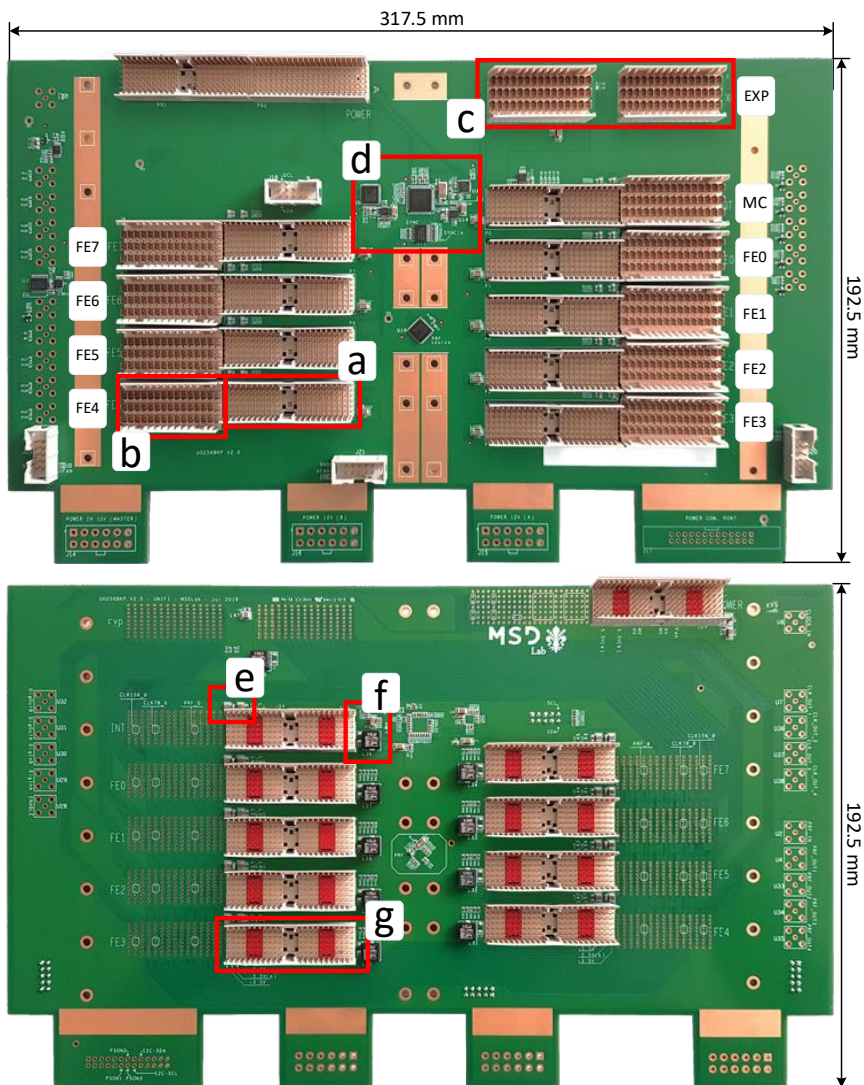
Top and bottom views of the Back-Plane v2.0.
